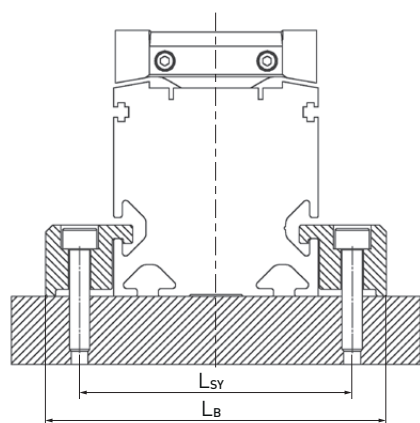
Hole spacing for the lateral securing of linear axes with clamping profiles
